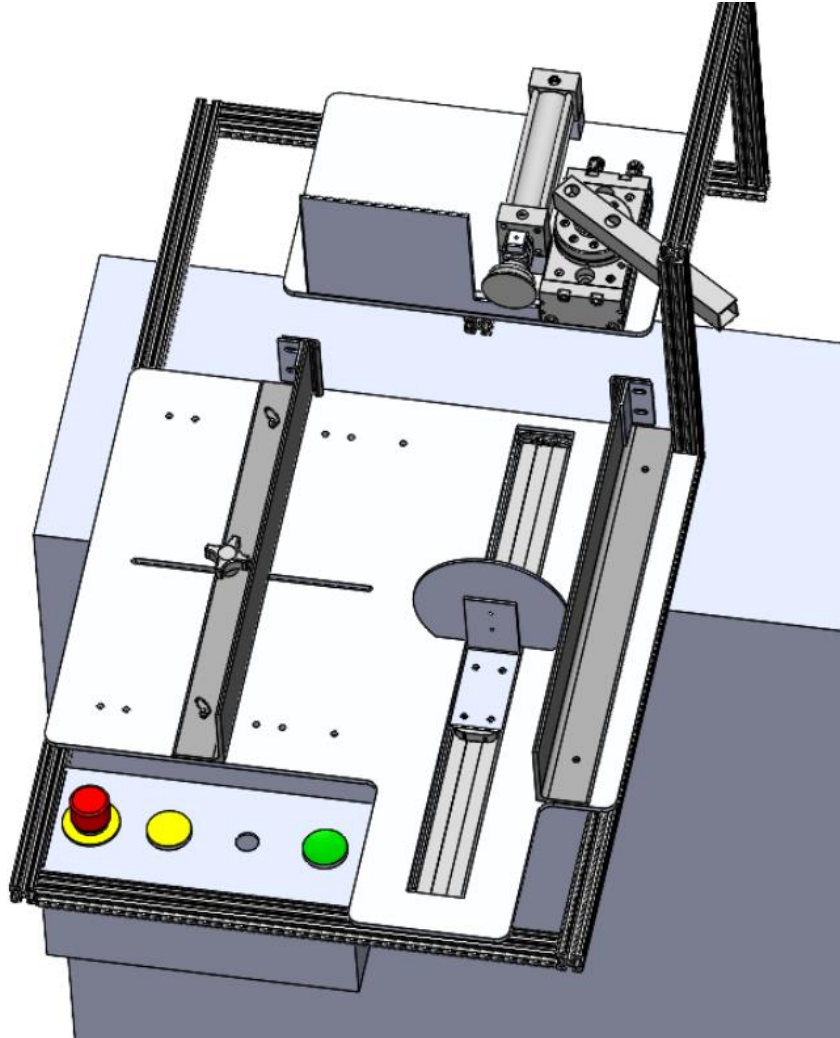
SOLIDWORKS assembly showing the T-slot framing around the entire machine
